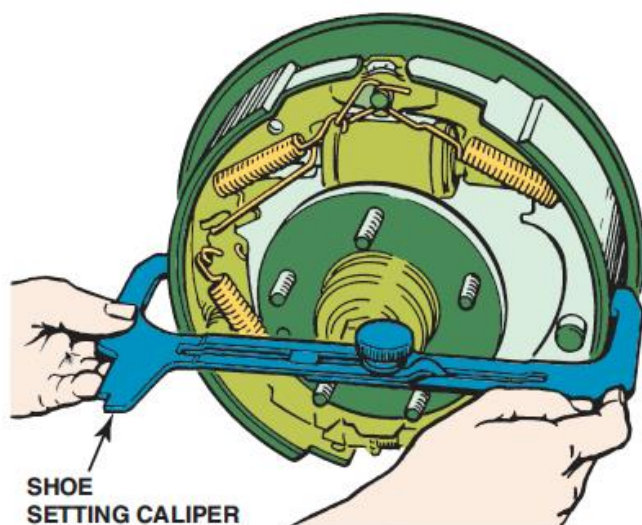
Place the gauge over the shoes and adjust the brakes until they contact the inside of the gauge.
